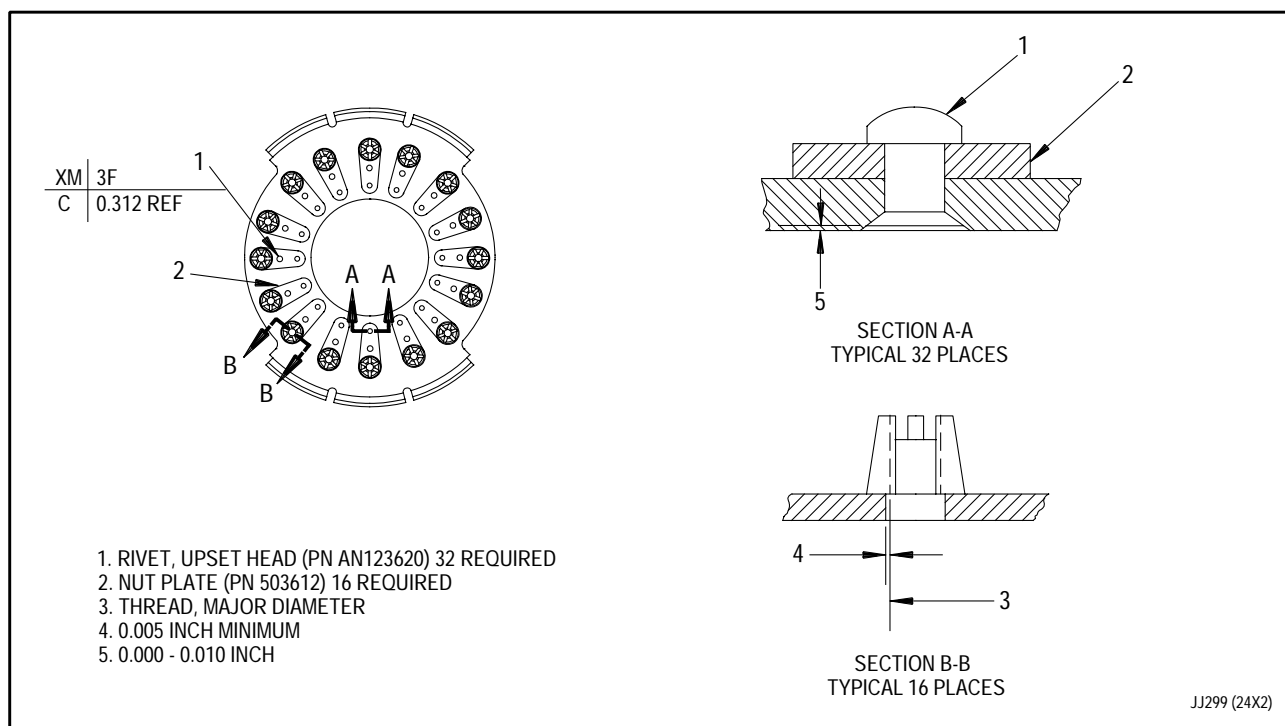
Front Compressor Drive Turbine Shaft Stiffener Assembly - Nut Plate Replacement
